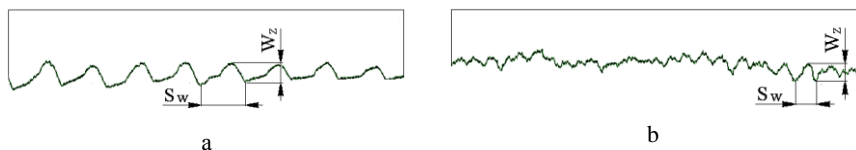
Profile of machined surfaces after up (a) and down (b) milling
